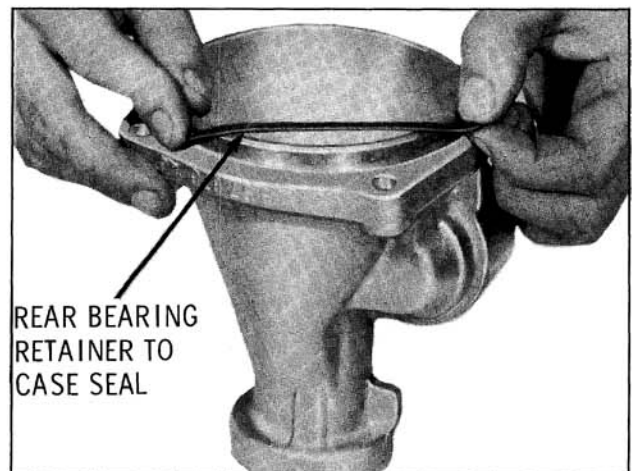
Installing Rear Bearing Retainer to Case Oil Seal
